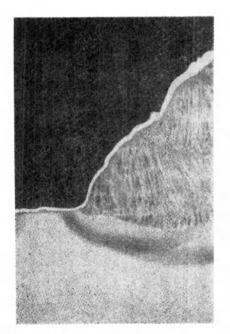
Macrosection of the welded toe profile of a cruciform fillet welded joint in HT80 in as welded condition using electrode L-70 (low hydrognn type)²×5.
